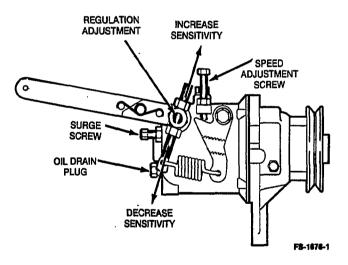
MECHANICAL GOVERNOR ASSEMBLY
